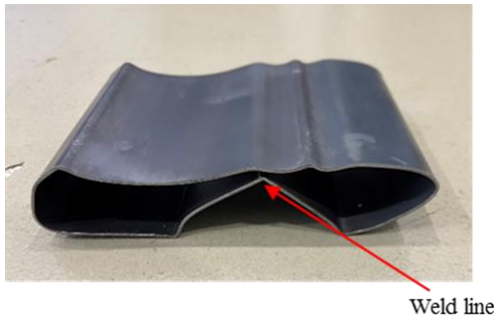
Deformation defects occasionally occurring at the weld line in laterally impact crushing experiments.
